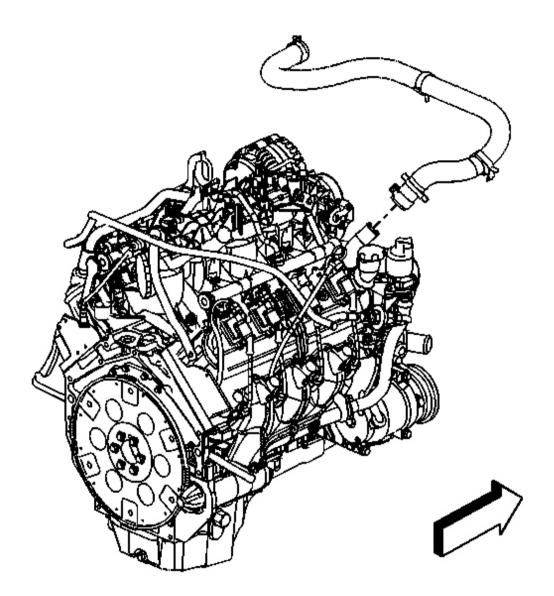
Inlet Hose & Water Pump (4.8, 5.3, & 6.0L) Courtesy of GENERAL MOTORS CORP.
